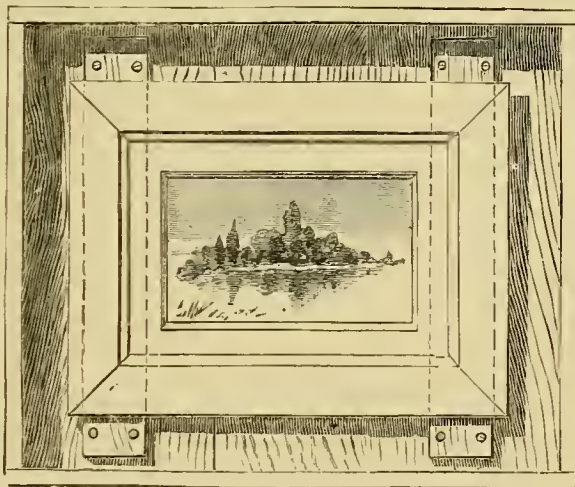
BATTENS CARRYING PICTURE SCREWED TO CASE.
